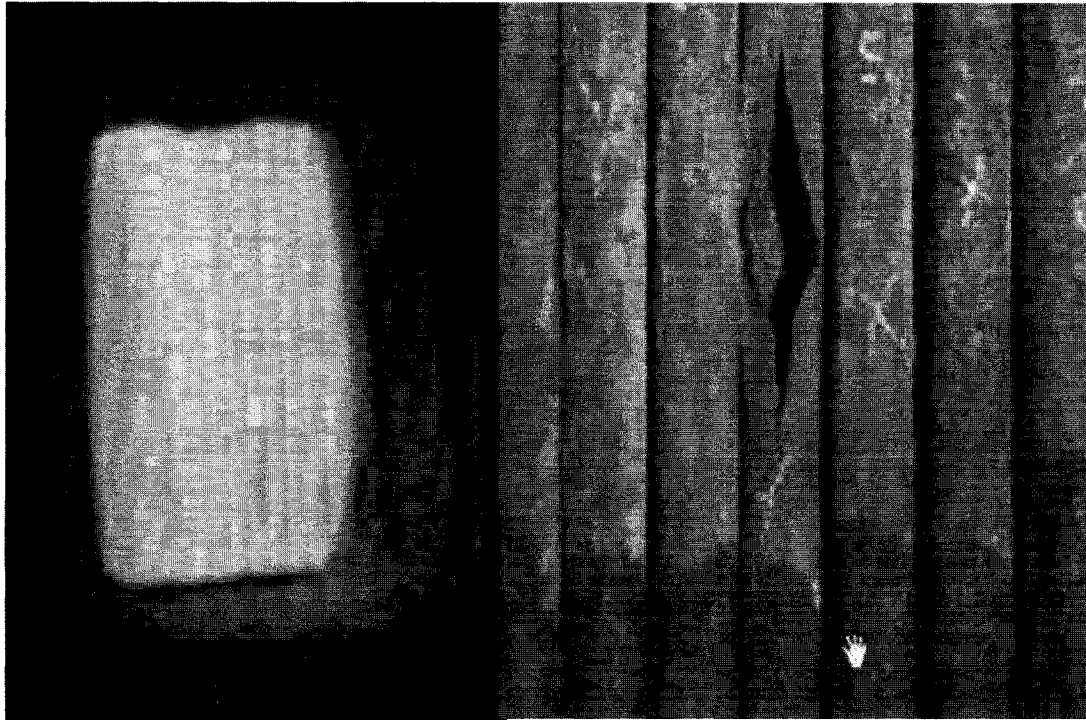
Corrosion Tube failure is the leading cause of boiler shutdowns [10].
